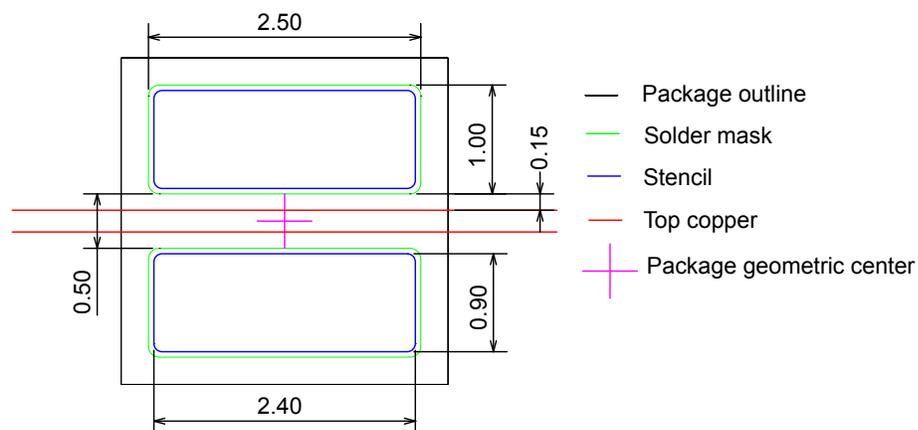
Recommended PCB footprint design for the LUXEON emitter. Dimensions are in mm.
